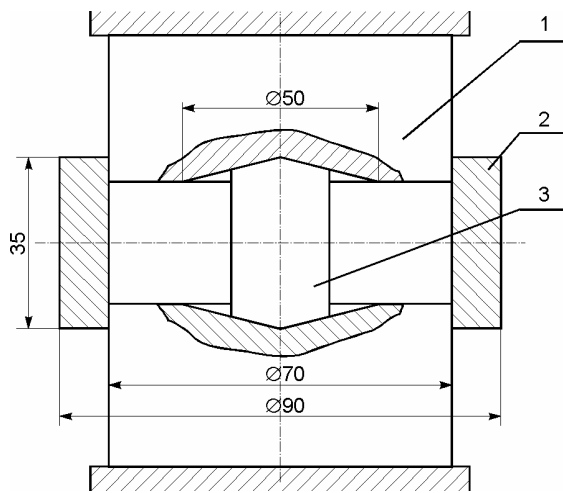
Tooling for upsetting die; 2 – ring; 3 – specimen
